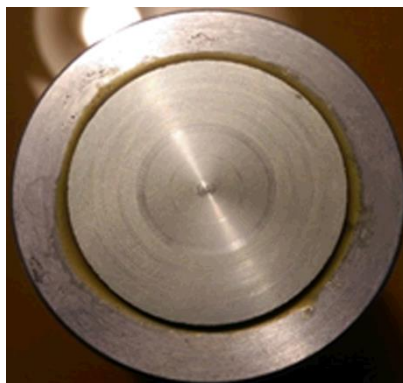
Sample of machined germanium and embedded in the relevant fixture
